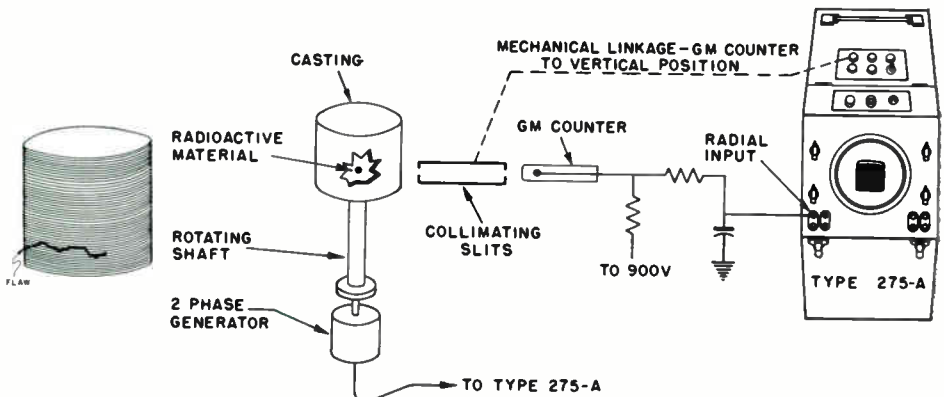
Set-up employed for the inspection of castings. At left is a sketch of the oscillogram obtained.
